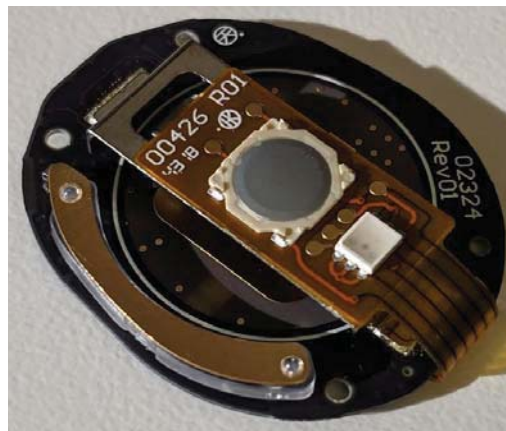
Lumi Soft Touch Sensor – Internal Photo – Top View
